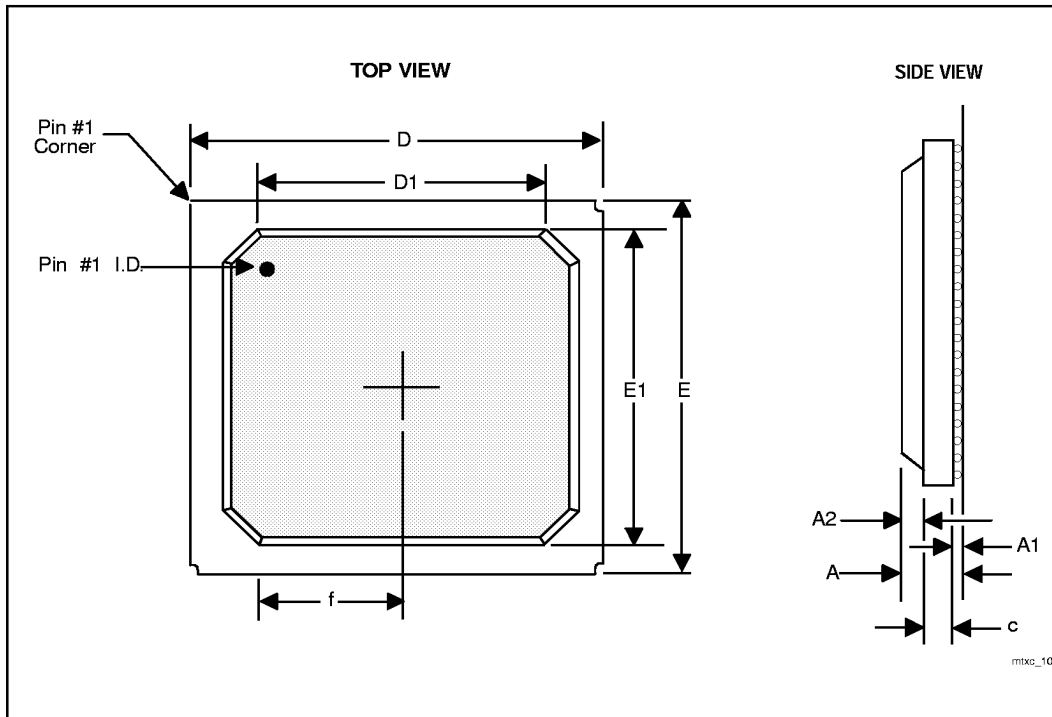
MTXC 324-pin Ball Grid Array (BGA)
